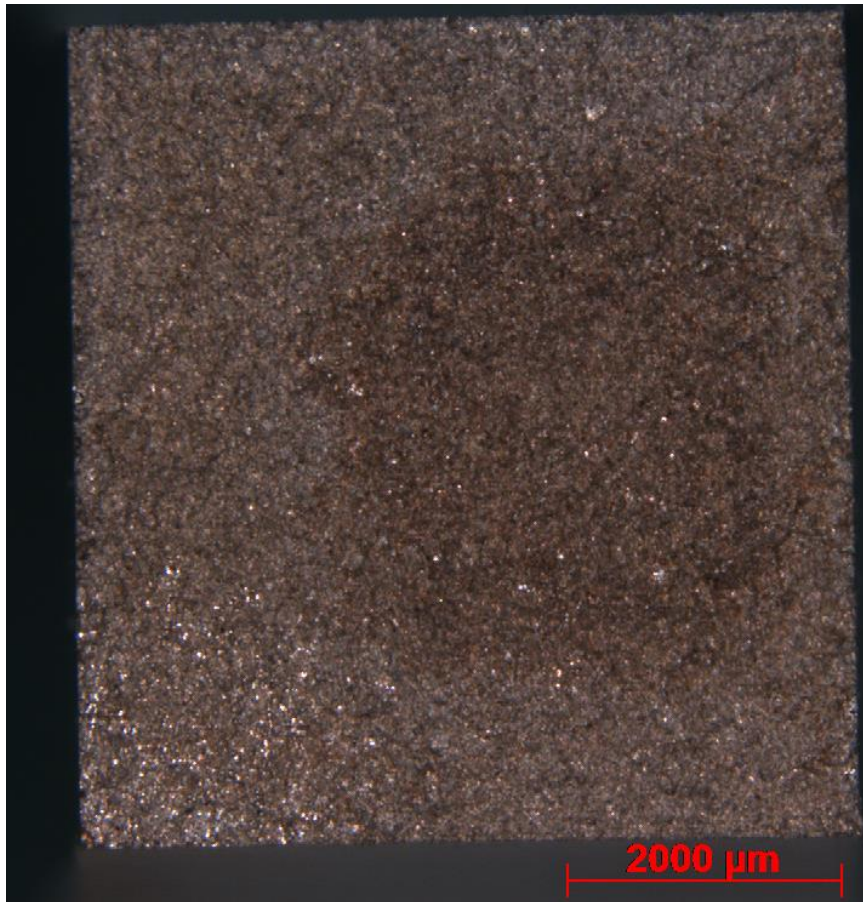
Macroscopic view of fracture surface of DHP - UT specimen by stereomicroscope
